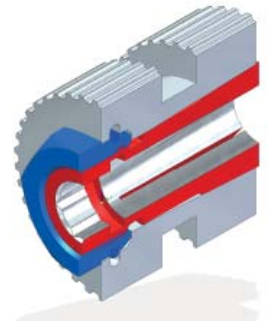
Customer-specified belt pulley, sectional view on the right. The design consists of an BOQA® fastening element and a fastening nut.
